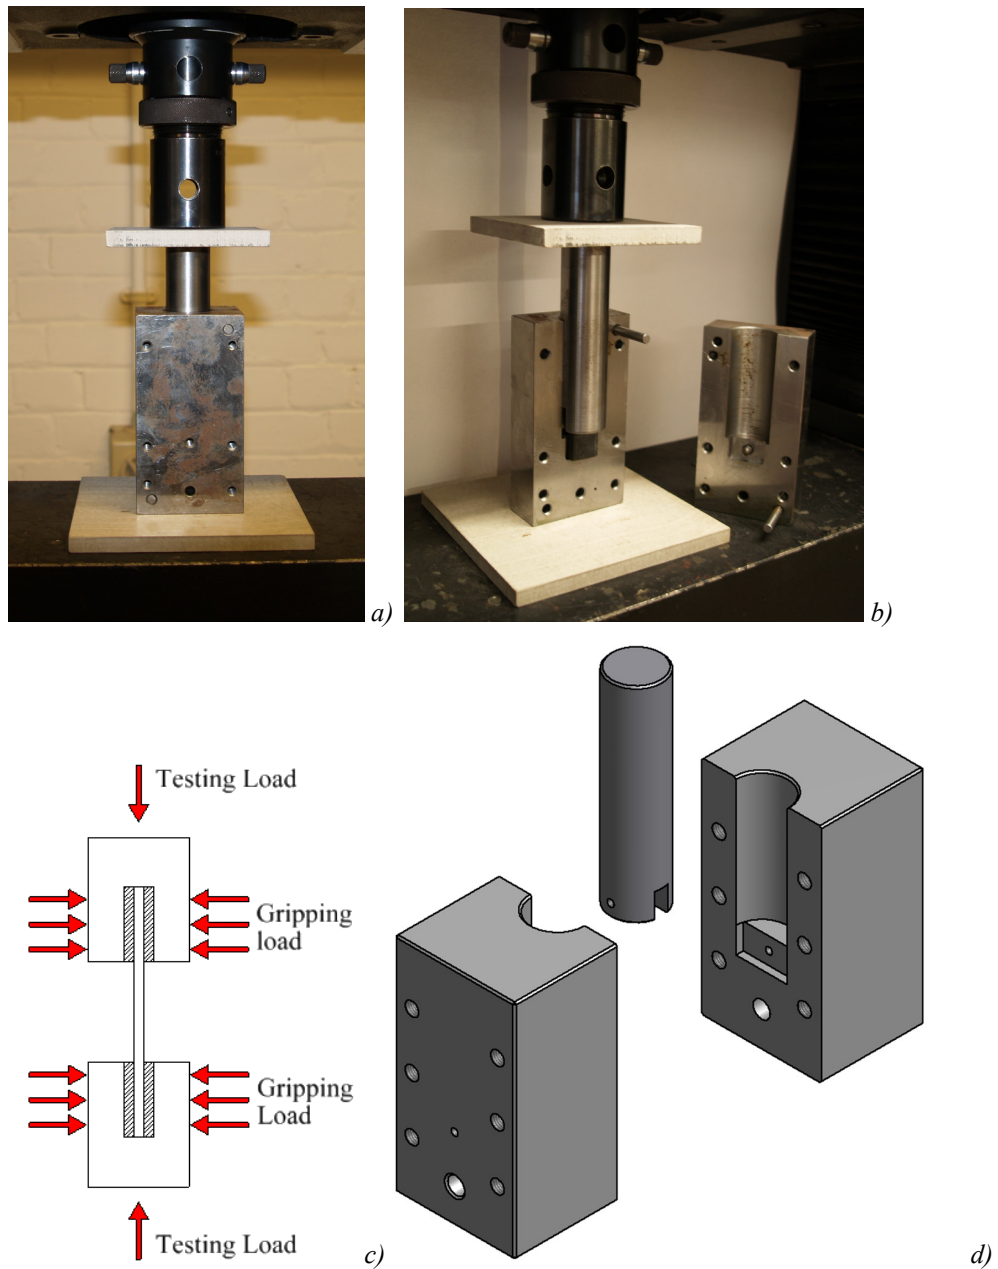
a) picture of the mounted compression test jig; b) picture showing the inside of the compression test jig; c) schematic of working principle according to BS EN ISO 14126 method 2; d) exploded view of CAD model of the compression test jig.
